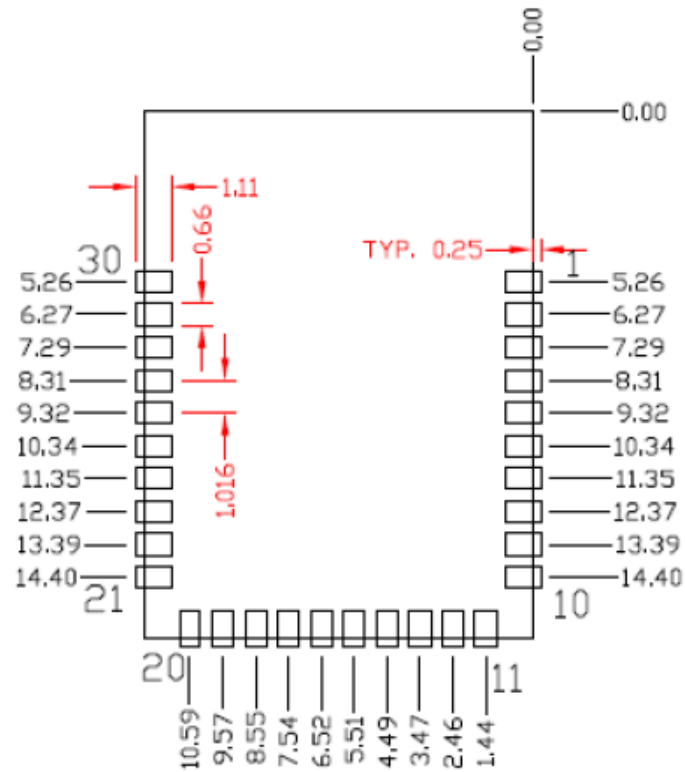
Host Board Required PCB Layout Pattern (Dimensioned View)
